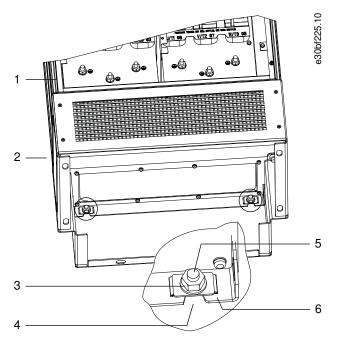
Pedestal-to-Cabinet Back Mounting Points
